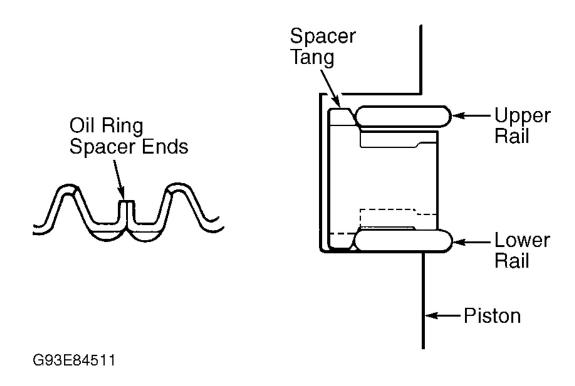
Identifying Oil Rings Courtesy of MAZDA MOTORS CORP.
